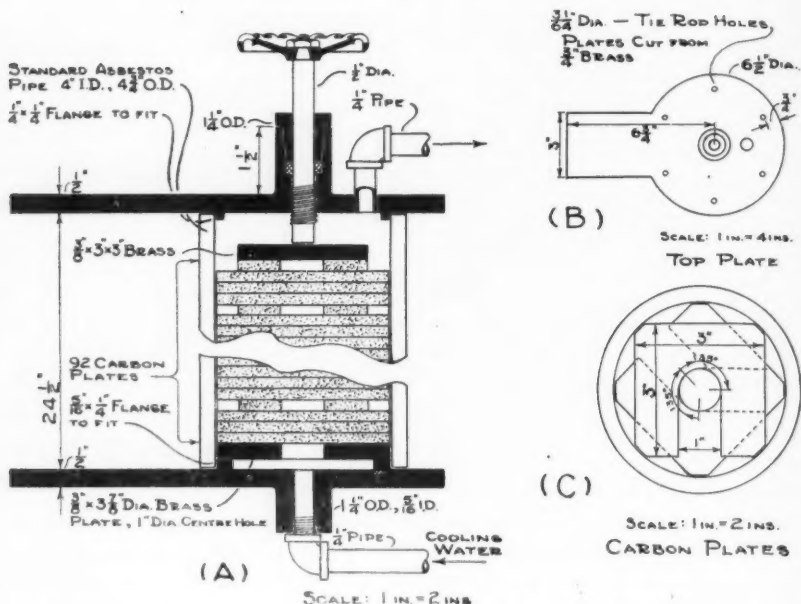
(A) Vertical section. (B) Casting detail, plan. (C) Arrangement of carbon plates, plan.
